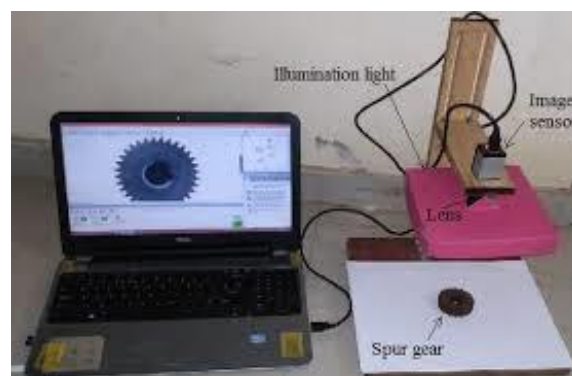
Spur Gear Automatic Inspection System
